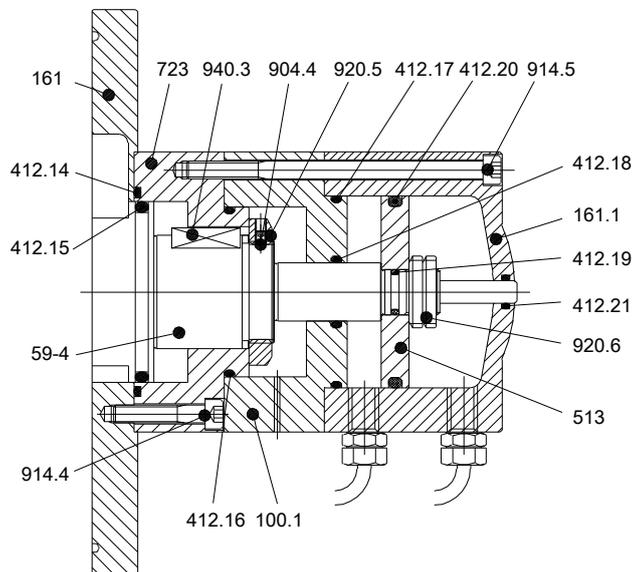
Pneumatic safety pressure relief valve (sectional drawing)
